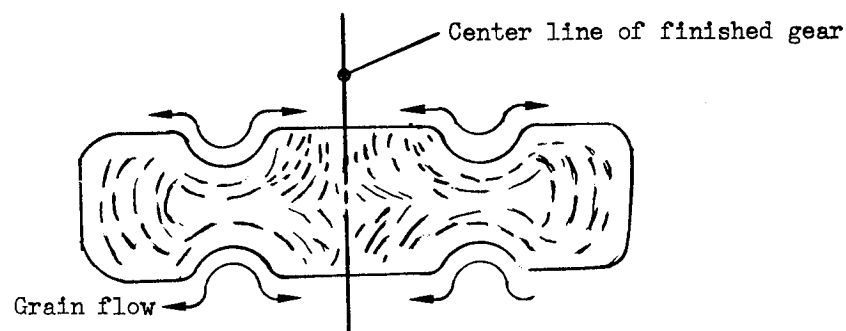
Cross-section sketch of a forging showing proper grain flow.
